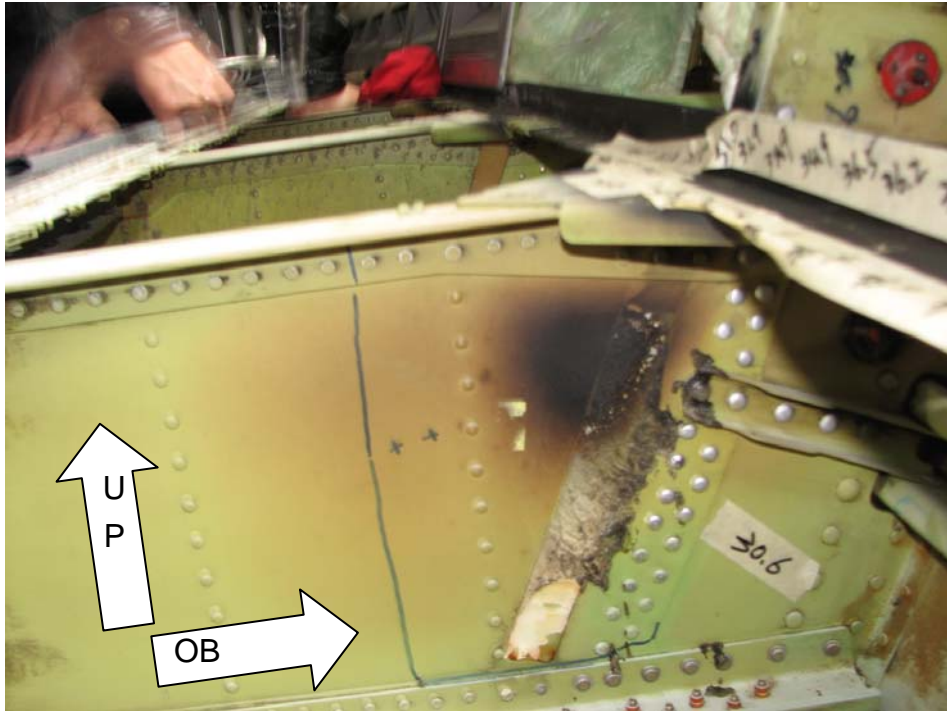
STA 2060 Forward Side of Floor Beam
